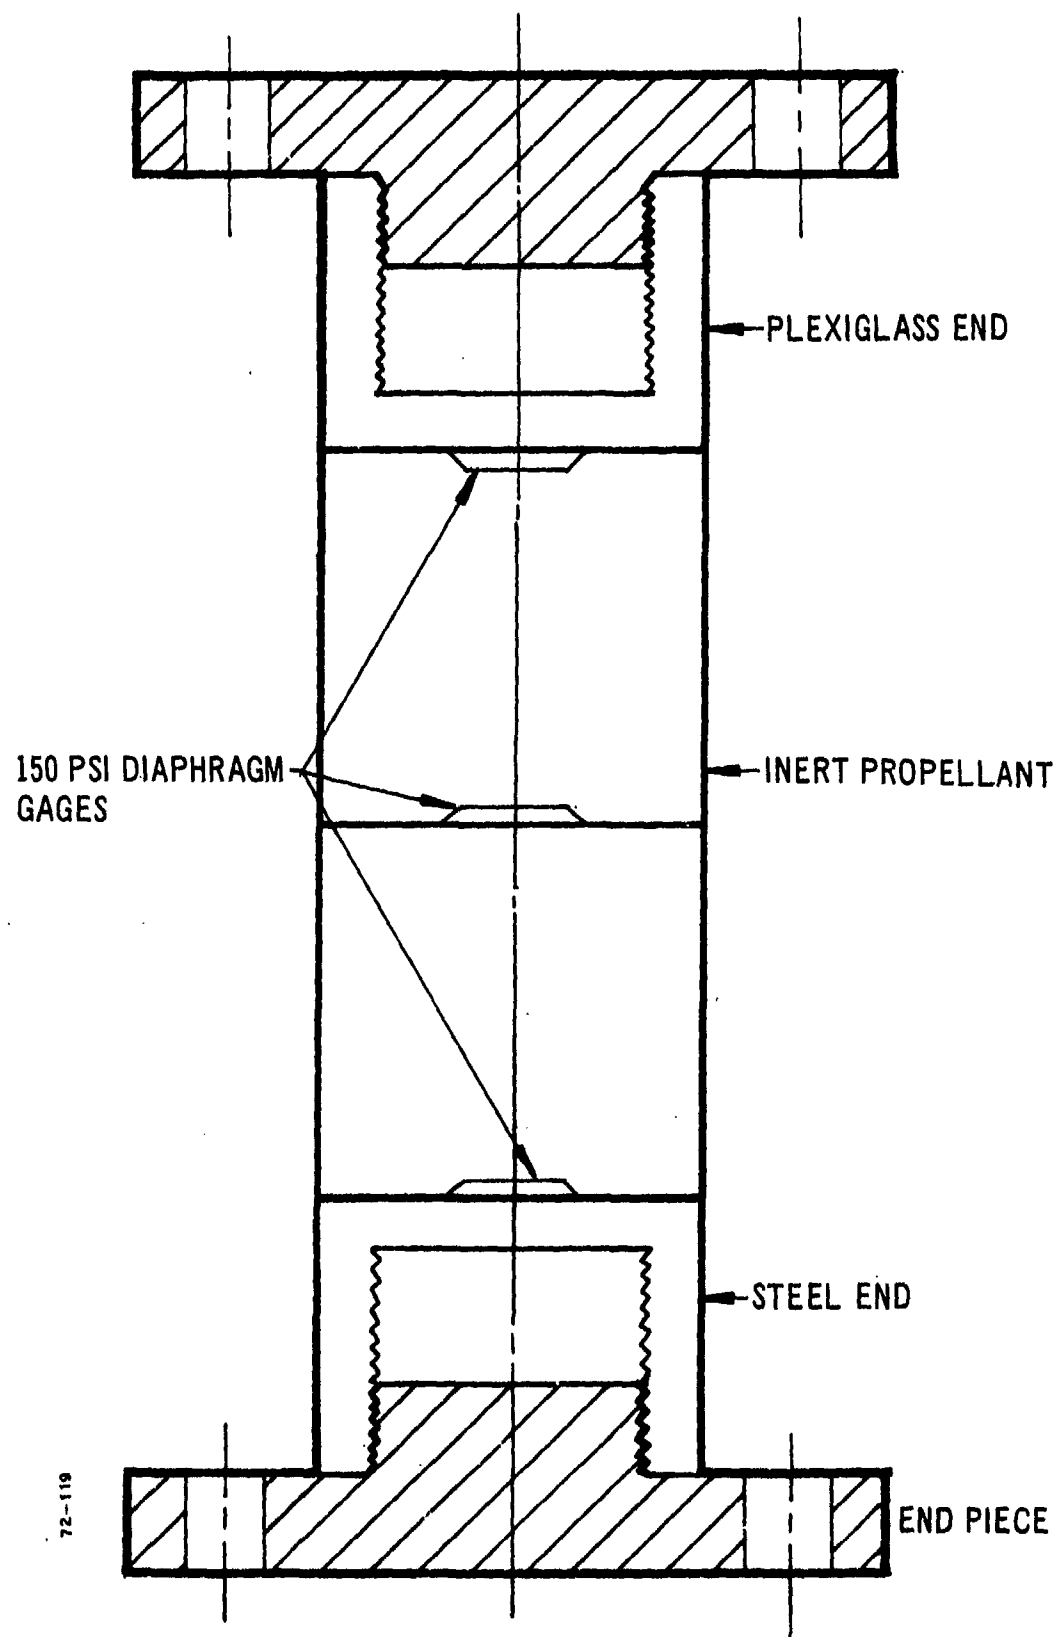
Uniaxial Test Fixture for Gage Calibration.
